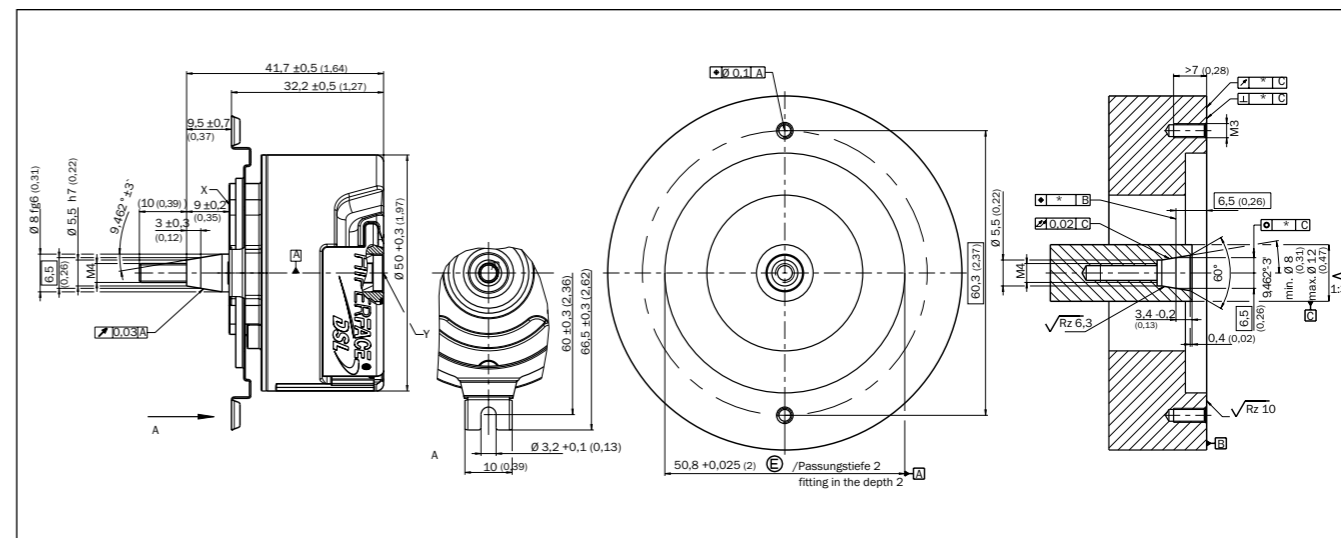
Dimensional drawing and conical shaft mounting specification with spring plate stator coupling
